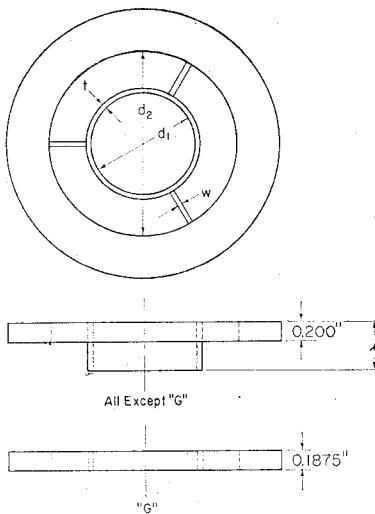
General drawing of open end plates; end view at top, side views at bottom.
